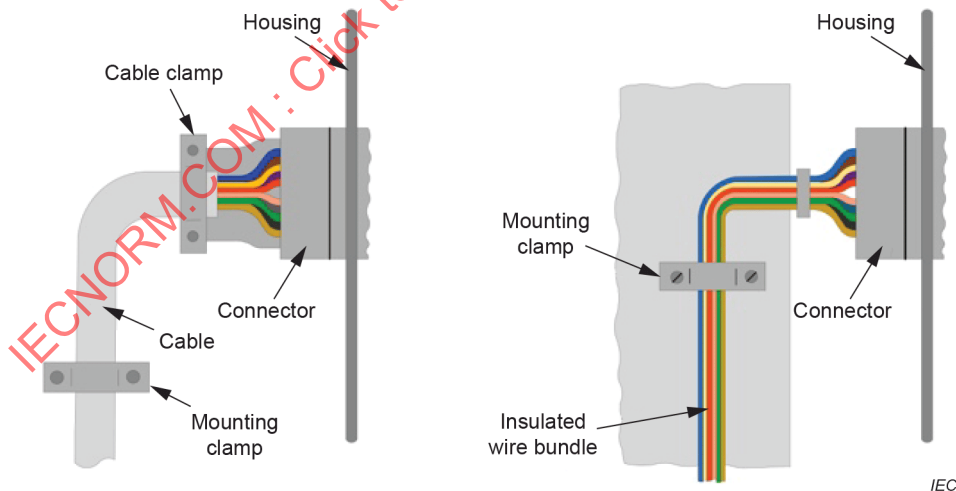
Mounting of wire bundles/cables with crimped contacts
